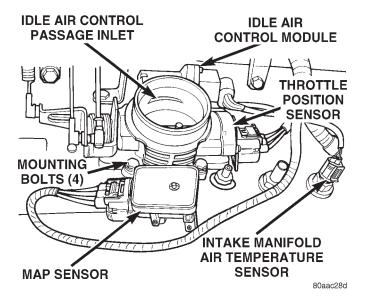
Throttle Body and Sensor Locations—4.0L Engine
